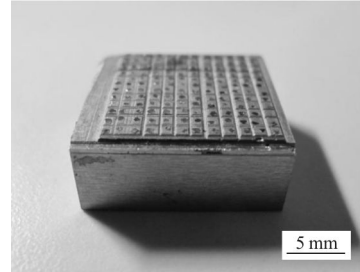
Braze welding diamond array used in the processing experiments
